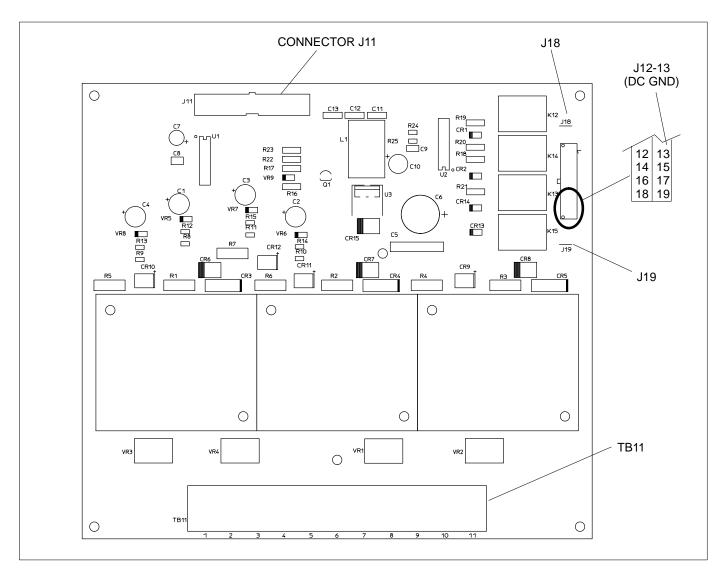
POWER MODULE 1 PCB COMPONENT LOCATIONS
